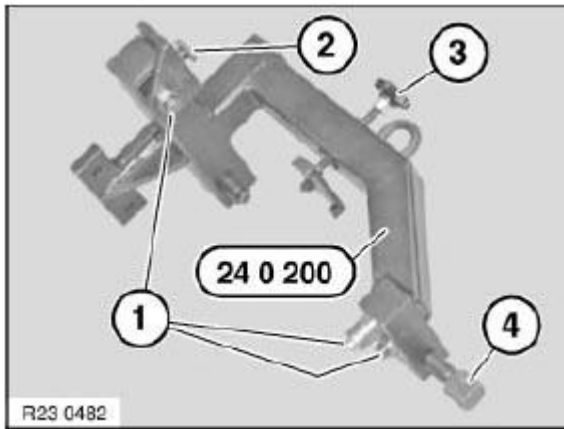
Identifying Adapters, Spindle And Thrust Piece
